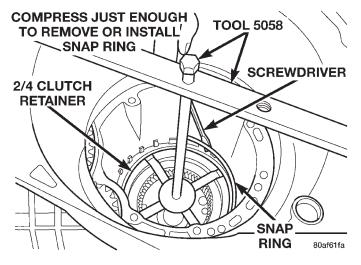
Remove 2/4 Clutch Retainer Snap Ring
